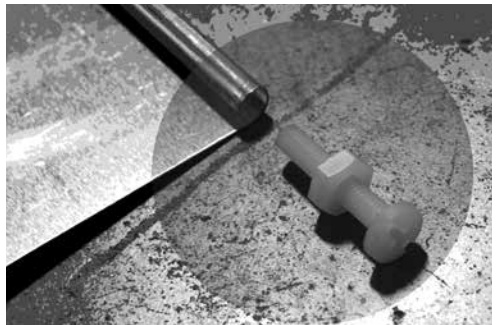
Nylon hinge screw, nylon pivot nut and louver hinge shown without IF unit for clarity
